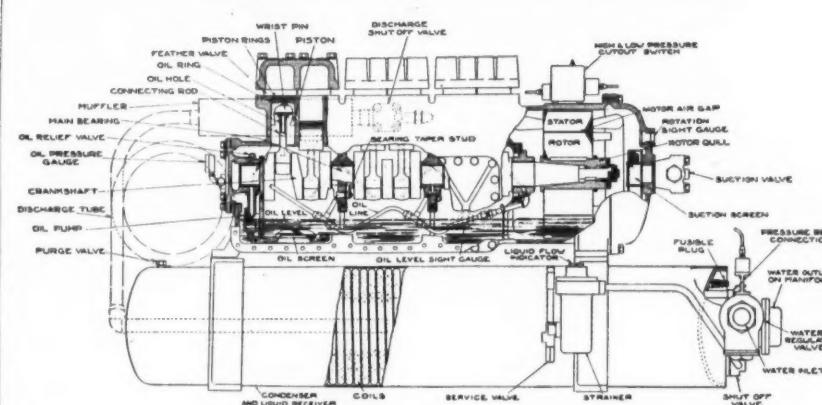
Internal construction of the Westinghouse type CIS-850 condensing unit. The oil pump is mounted on the end bearing opposite the motor end of the compressor. Via drilled crankshaft and connecting rods, full pressure lubrication is developed throughout the machine.
